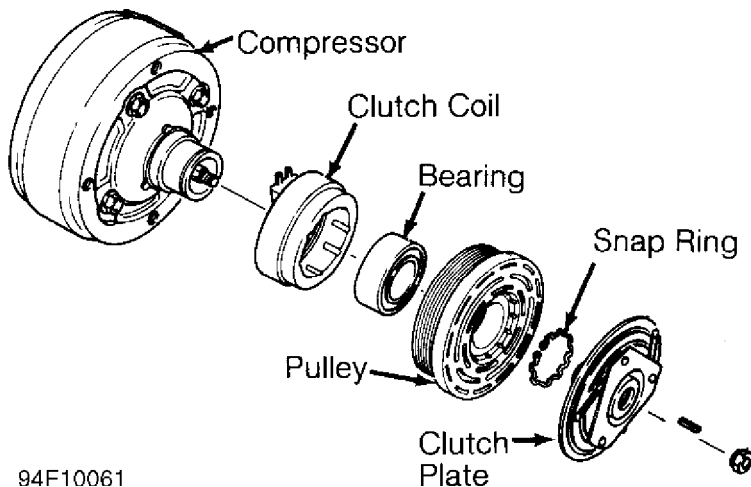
Exploded View Of Compressor (Harrison R4 4-Cylinder)
